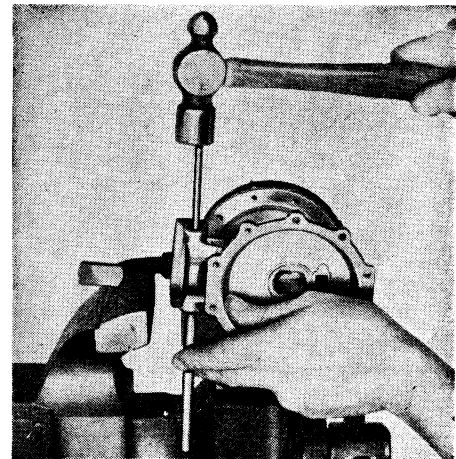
Series AJ. Driving out pin assembly by installing permanent rocker arm pin
